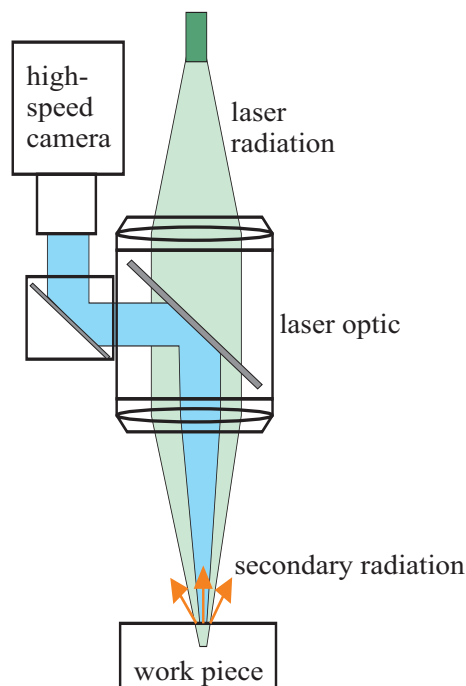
Schematic setup for monitoring a laser welding process.
